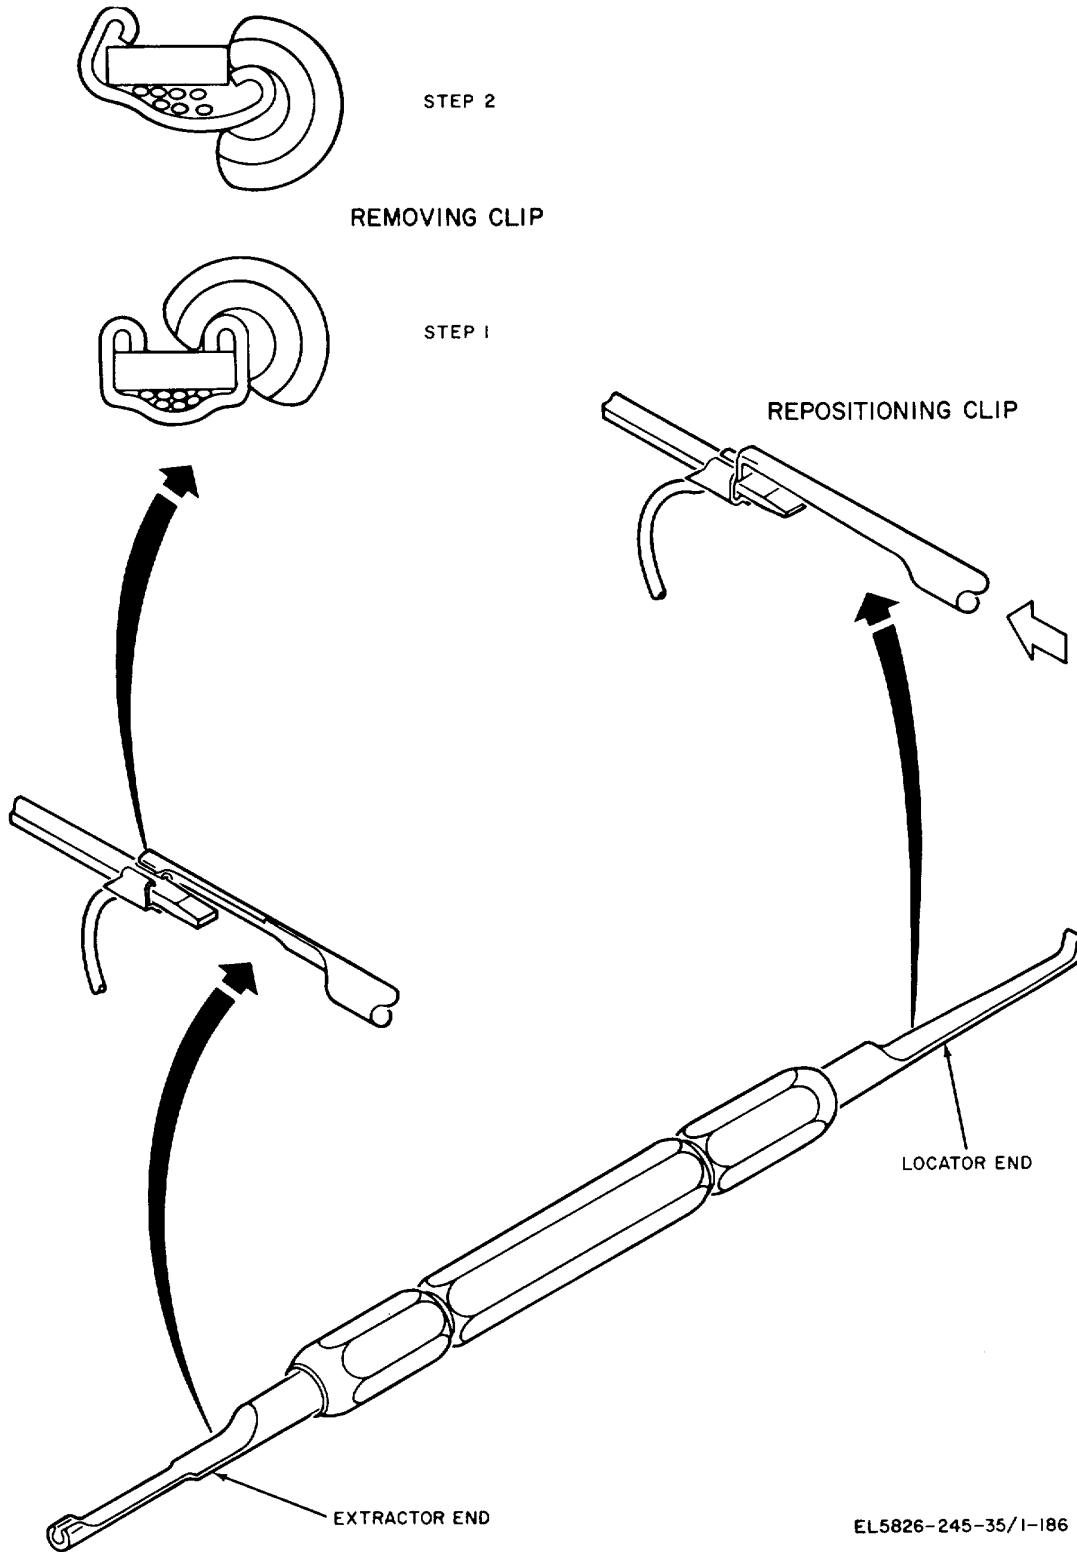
(1). Removal and replacement of special purpose electrical cable assembly connectors (sheet 1 of 2).
